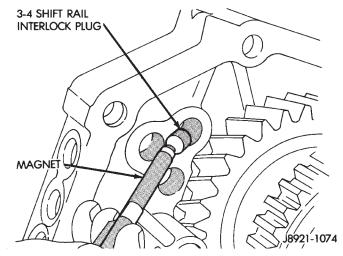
Remove 3-4 Shift Rail Interlock Plug
